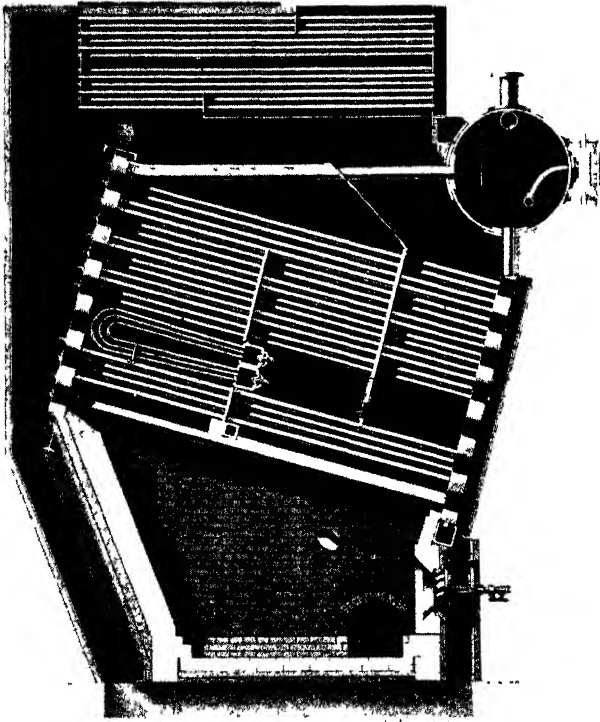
Babcock and Wilcox marine water-tube boiler.
